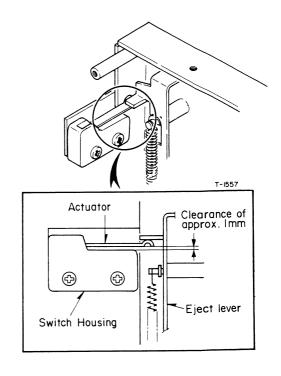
Micro Switch (B) Ass'y Clearance Adjustment
